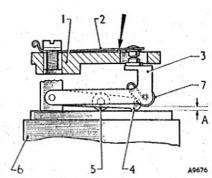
The contact gap setting on earlier-type rocker assemblies
